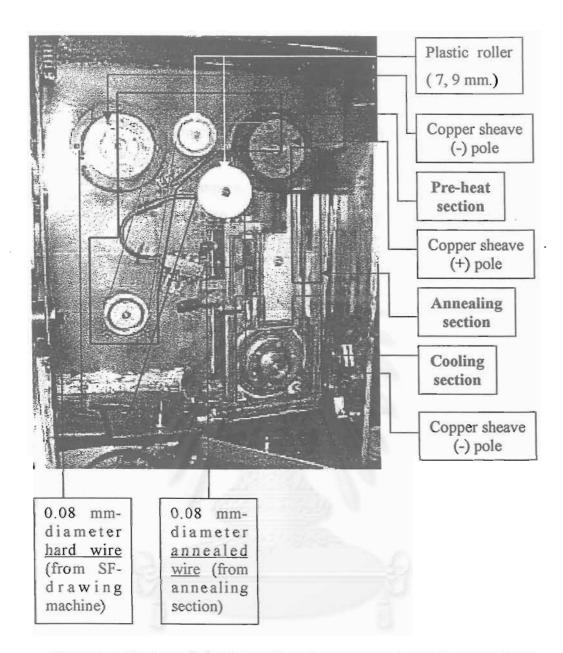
Pre-heat, annealing, and cooling section of annealing machine.
